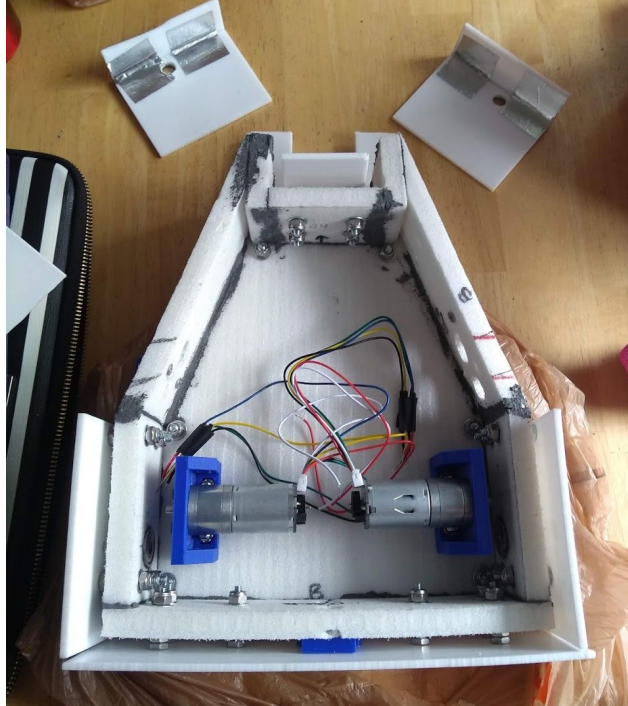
Chassis with front and side Teflon panels attached and secured motor mounts
